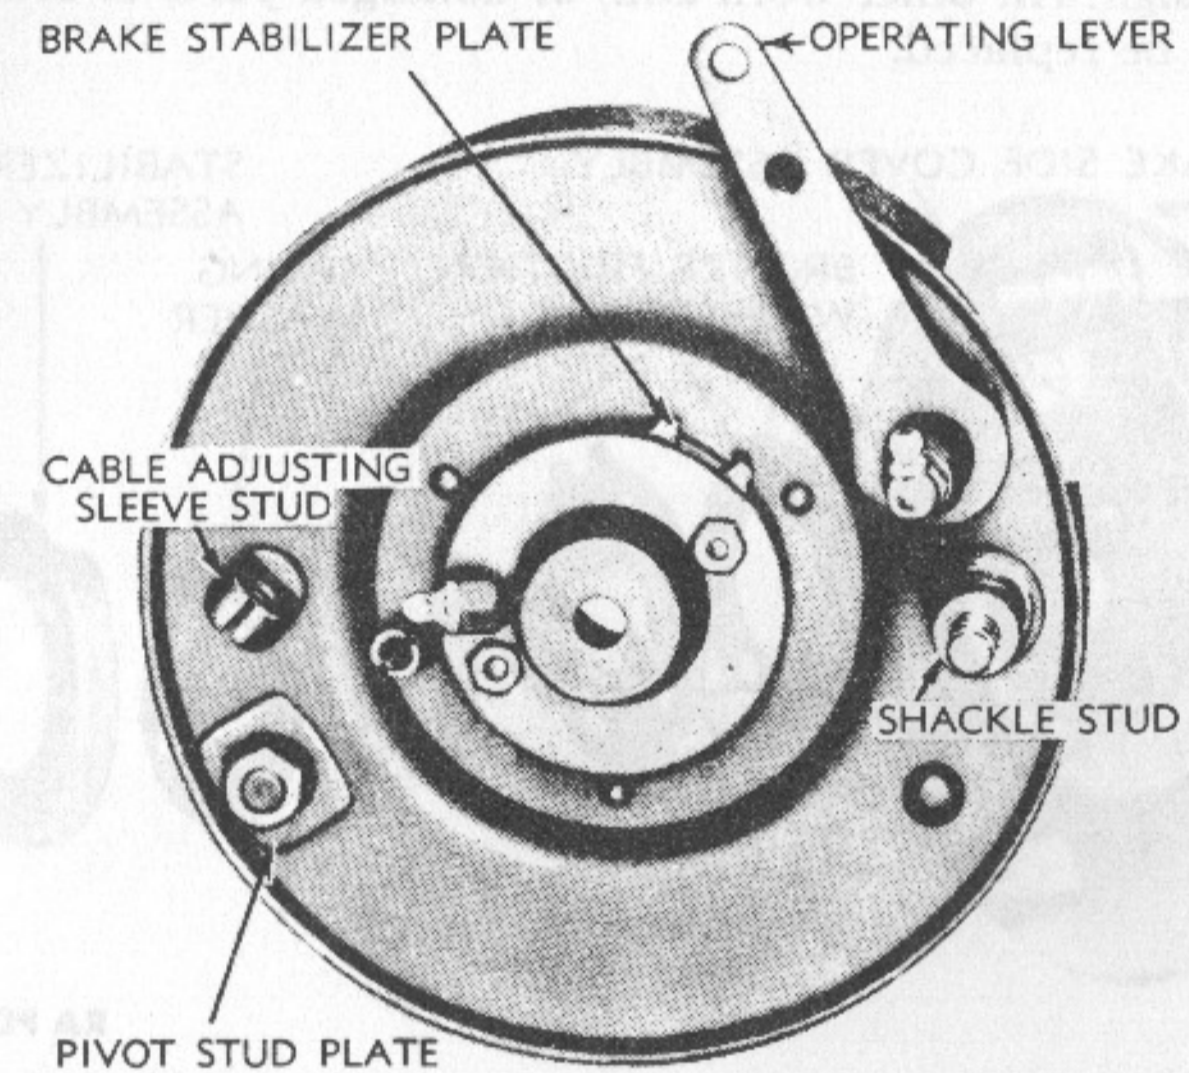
Front Wheel Brake Side Cover Assembly (Outside)
